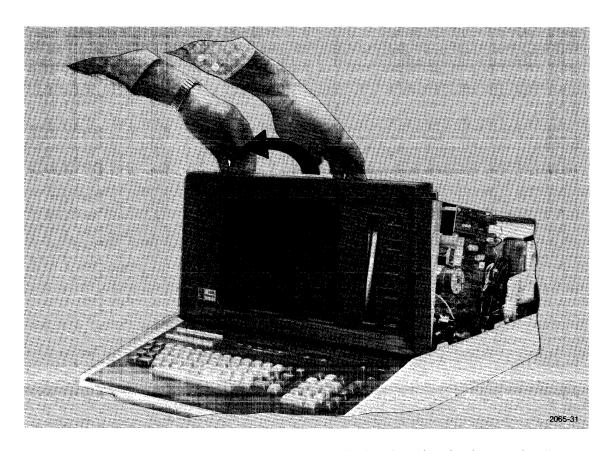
Front coverplate removal to gain access to crt, keyboard, cpu board and memory board.
